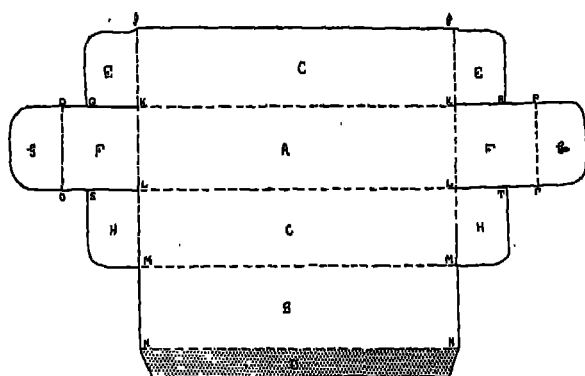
SINGLE-PIECE PACKET FOR TUBES OF COLD CURE.
